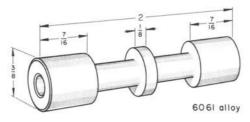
Part from which 0.005 mm (0.0002 in.) of metal was removed by lapping to smooth the surface to 0.025 μ m (1 μ in.). Dimensions given in inches
